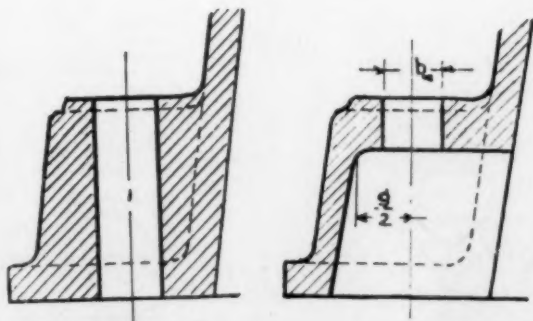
LIGHTENING SECTION (RIGHT) MAKES FOR BETTER CASTING THAN METHOD ON LEFT, CONSERVING METAL.
